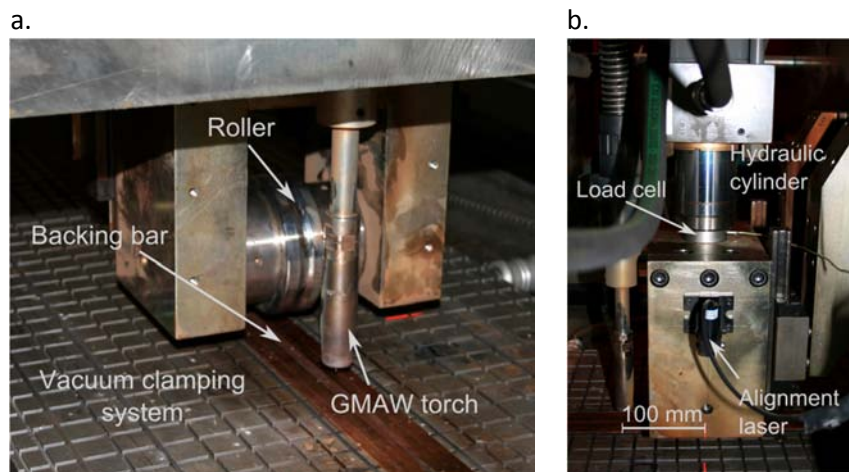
Apparatus for localised rolling of weld seam: (a.) front view, (b.) side view.
